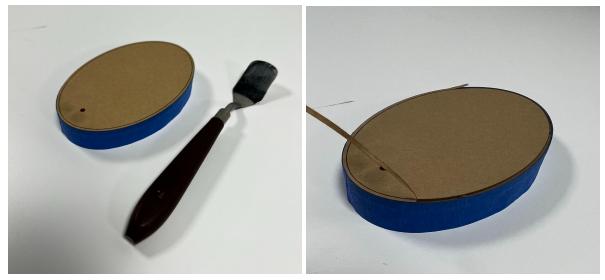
Removal of thin outer paper ellipse to reveal surface for adhesive spray
